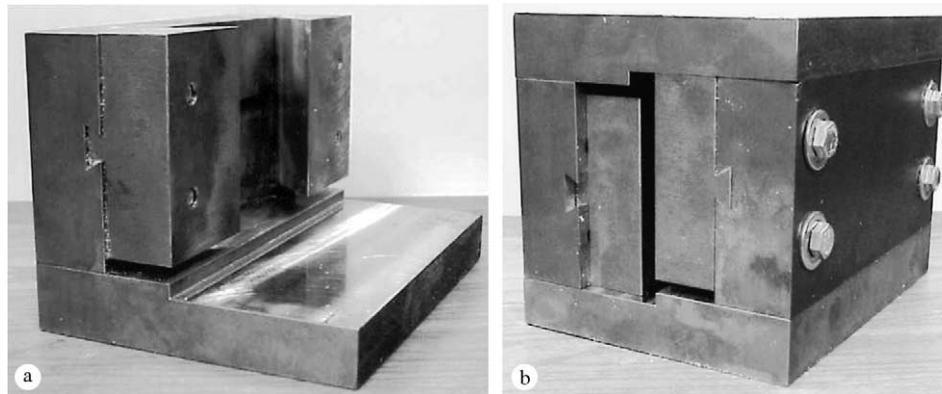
(a) Bottom step plate, side plate and two sliding blocks (one half of tool). (b) Completed shear tool with both halves connected together.
